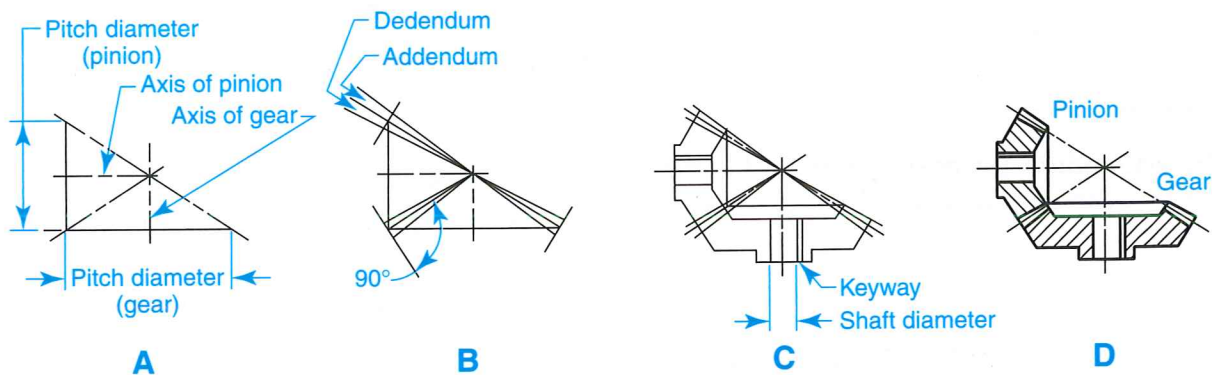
When drawing bevel gears, the teeth are usually shown in simplified conventional form.
